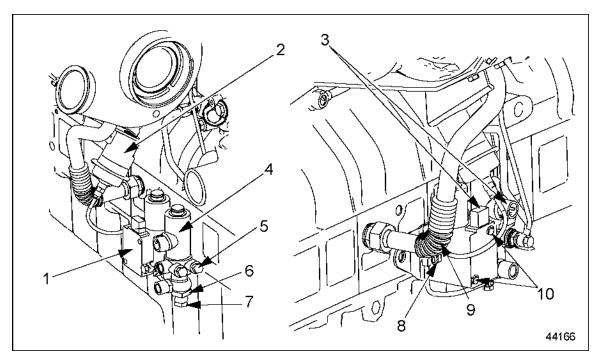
Installing the EPV Valve / Wabco Solenoid Valve
